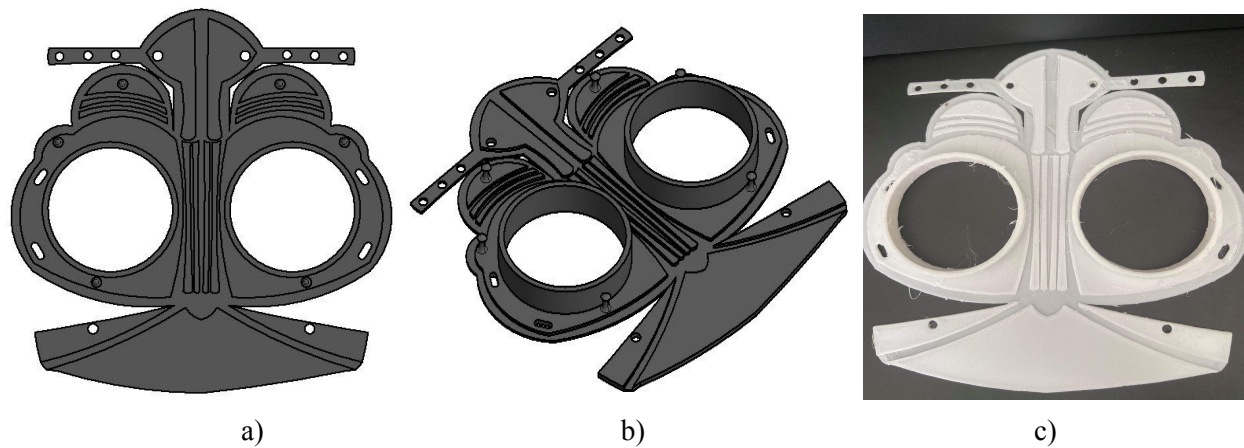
a) Top view of the face mask. b) Top-side view of the face mask. c) 3D printed mask
